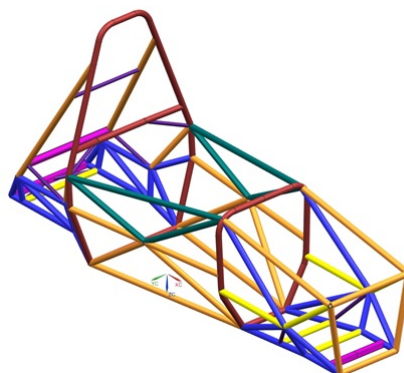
An isometric view of the different tubes which make up the chassis according to Table 17.
